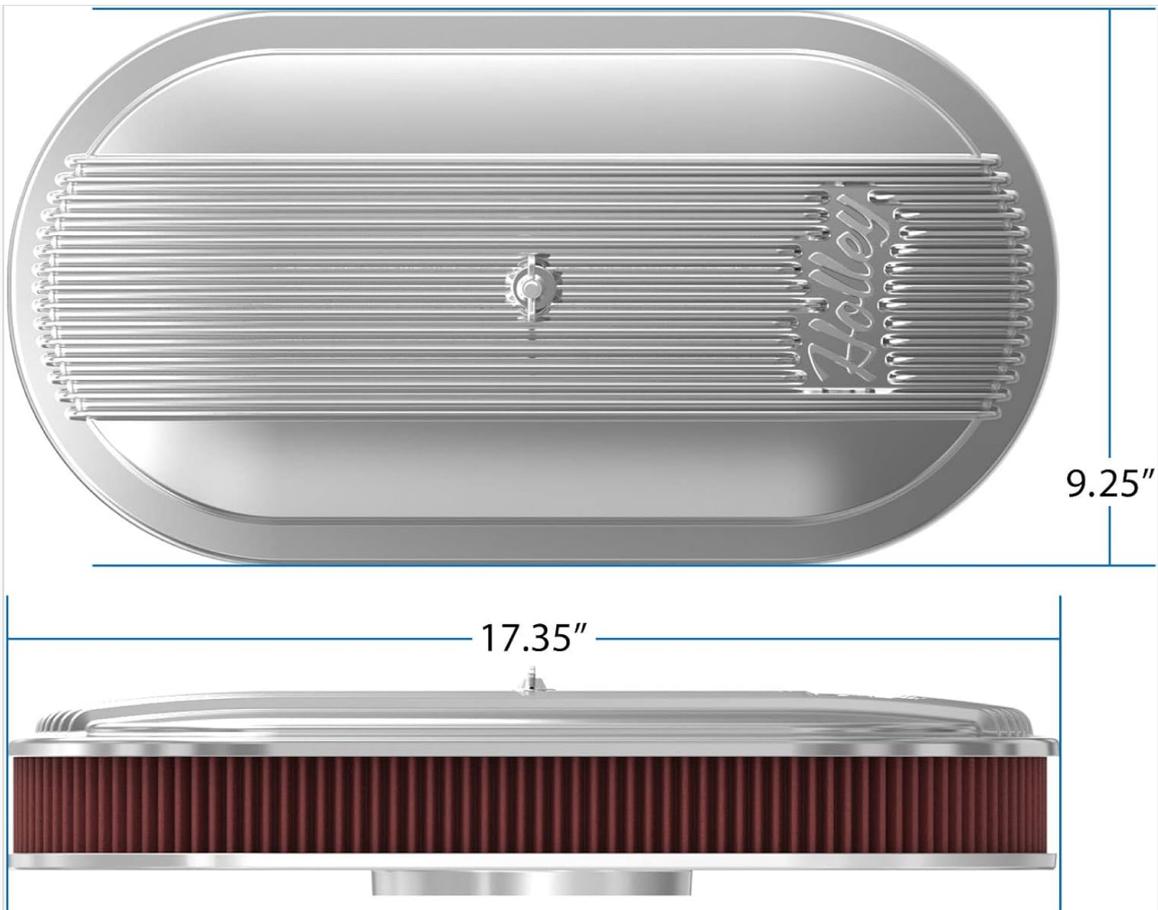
Top and side views of the air cleaner with overall length and width dimensions.
